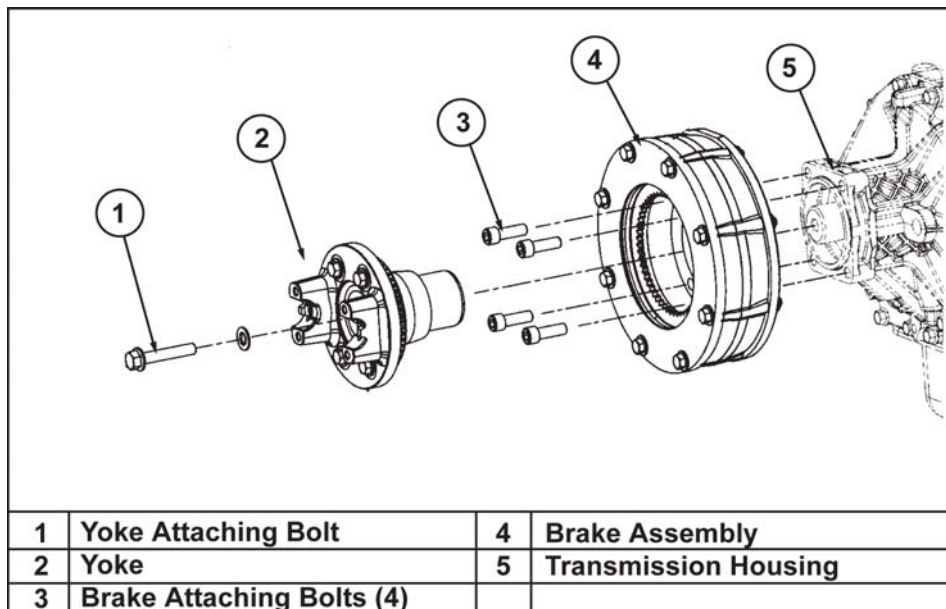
J72 Auto Apply Park Brake – Transmission Mounted Brake Assembly
